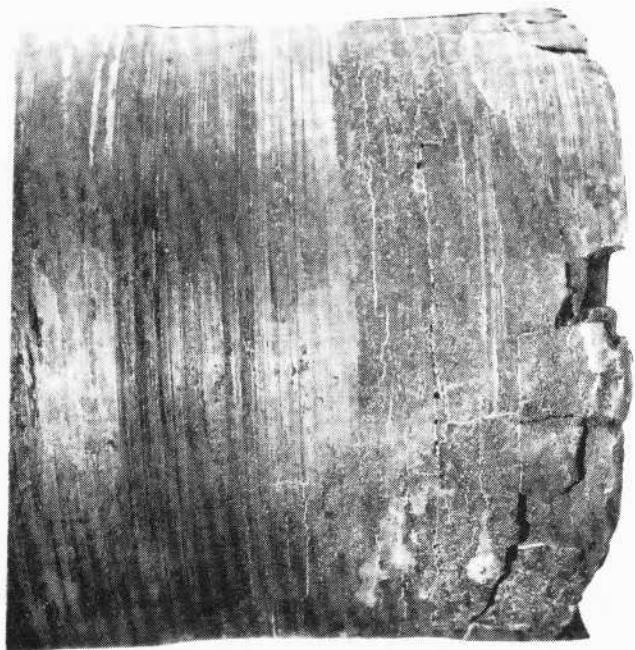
Support Bearing Failure Due To Lack Of Lubrication
